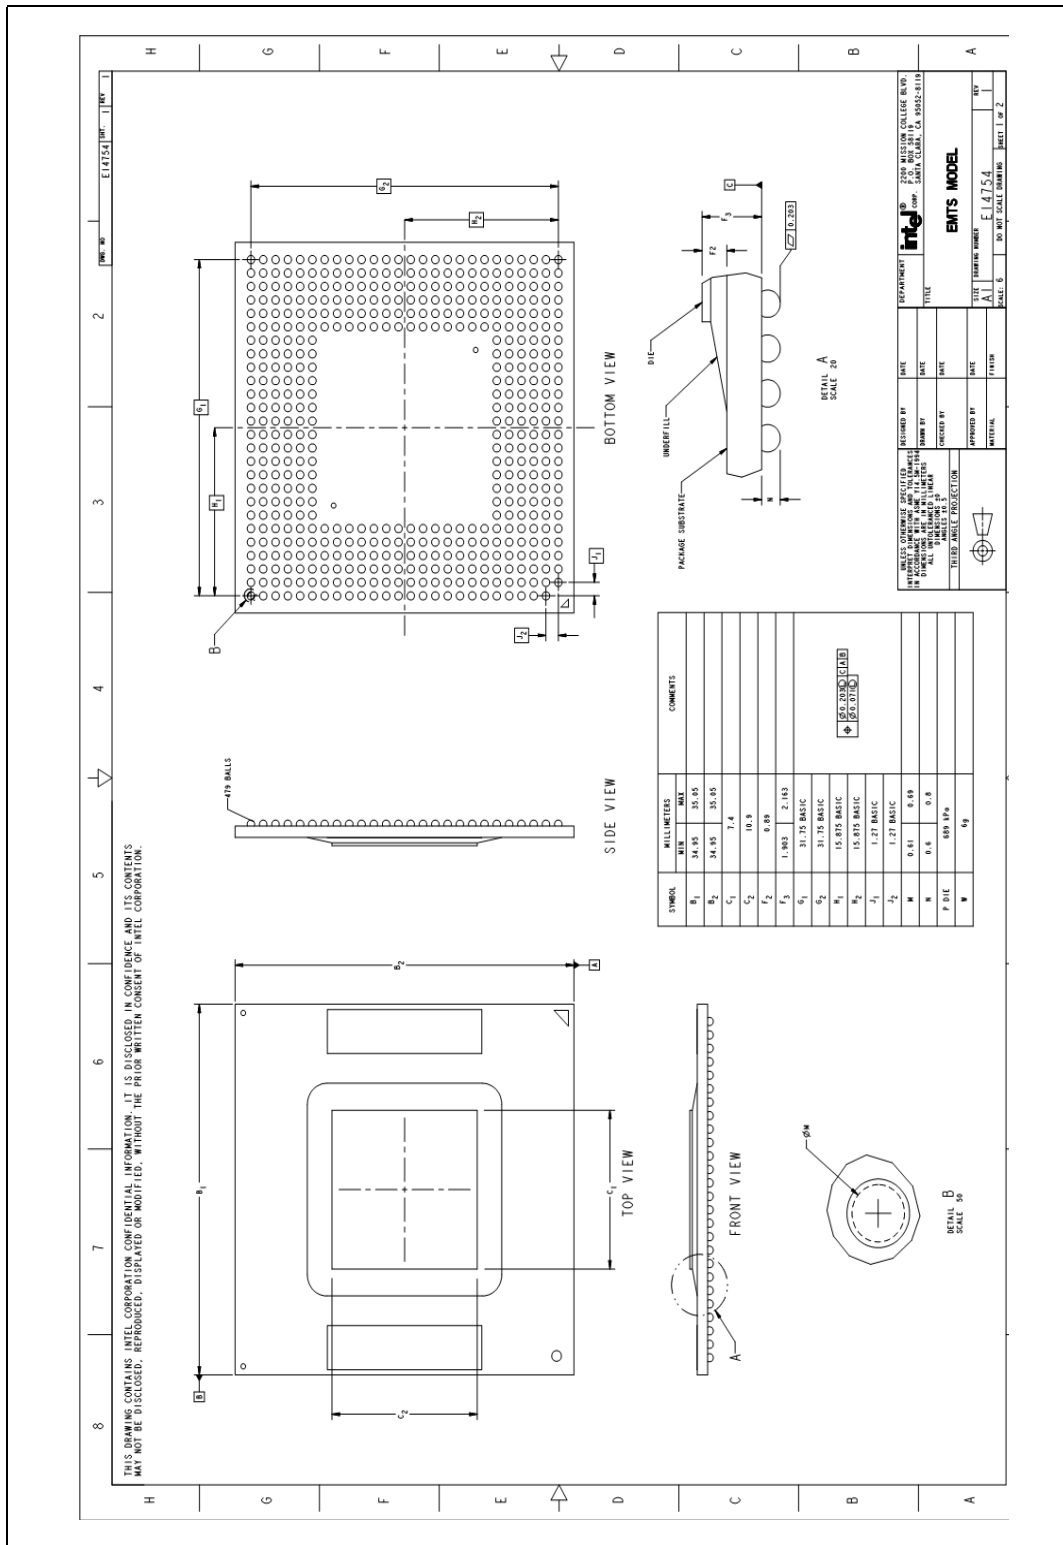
1-MB Micro-FCBGA Processor Package Drawing (2 of 2)
